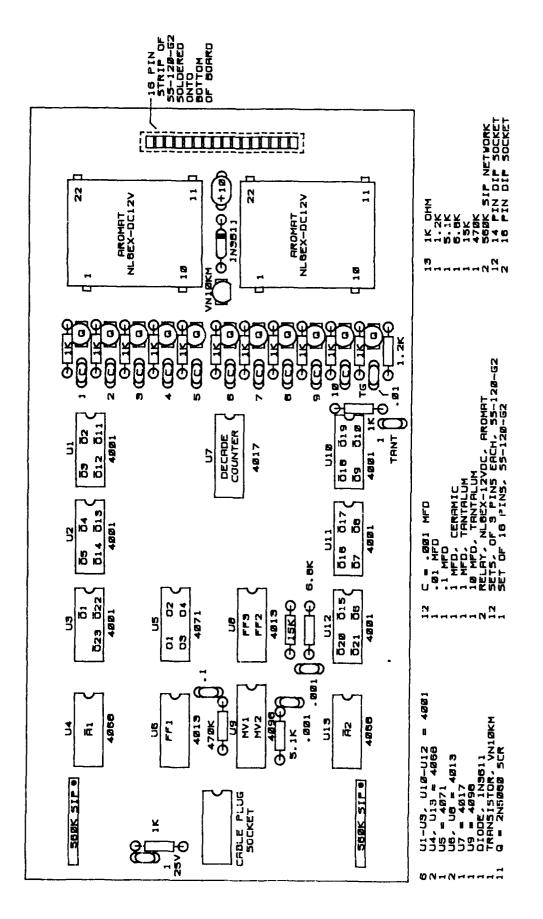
TEST PRINTED CIRCUIT BOARD COMPONENT LAYOUT
